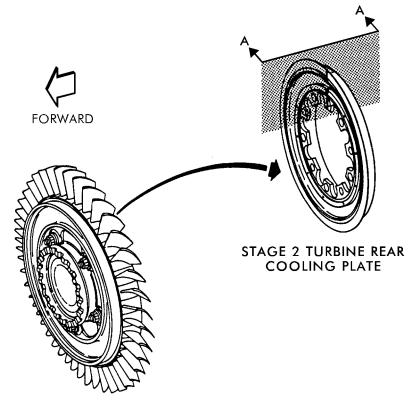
(T700) Labyrinth Seals for Wear; Inspection (Sheet 1 of 2)
